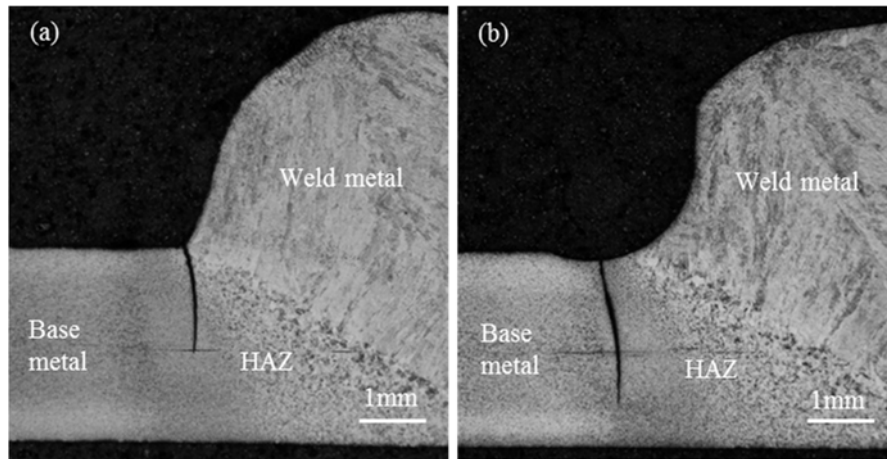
Cross-sections of 980B welded specimens after fatigue testing. (a) as-welded joint, (b) toe machined joint with radius of 1.5mm.
